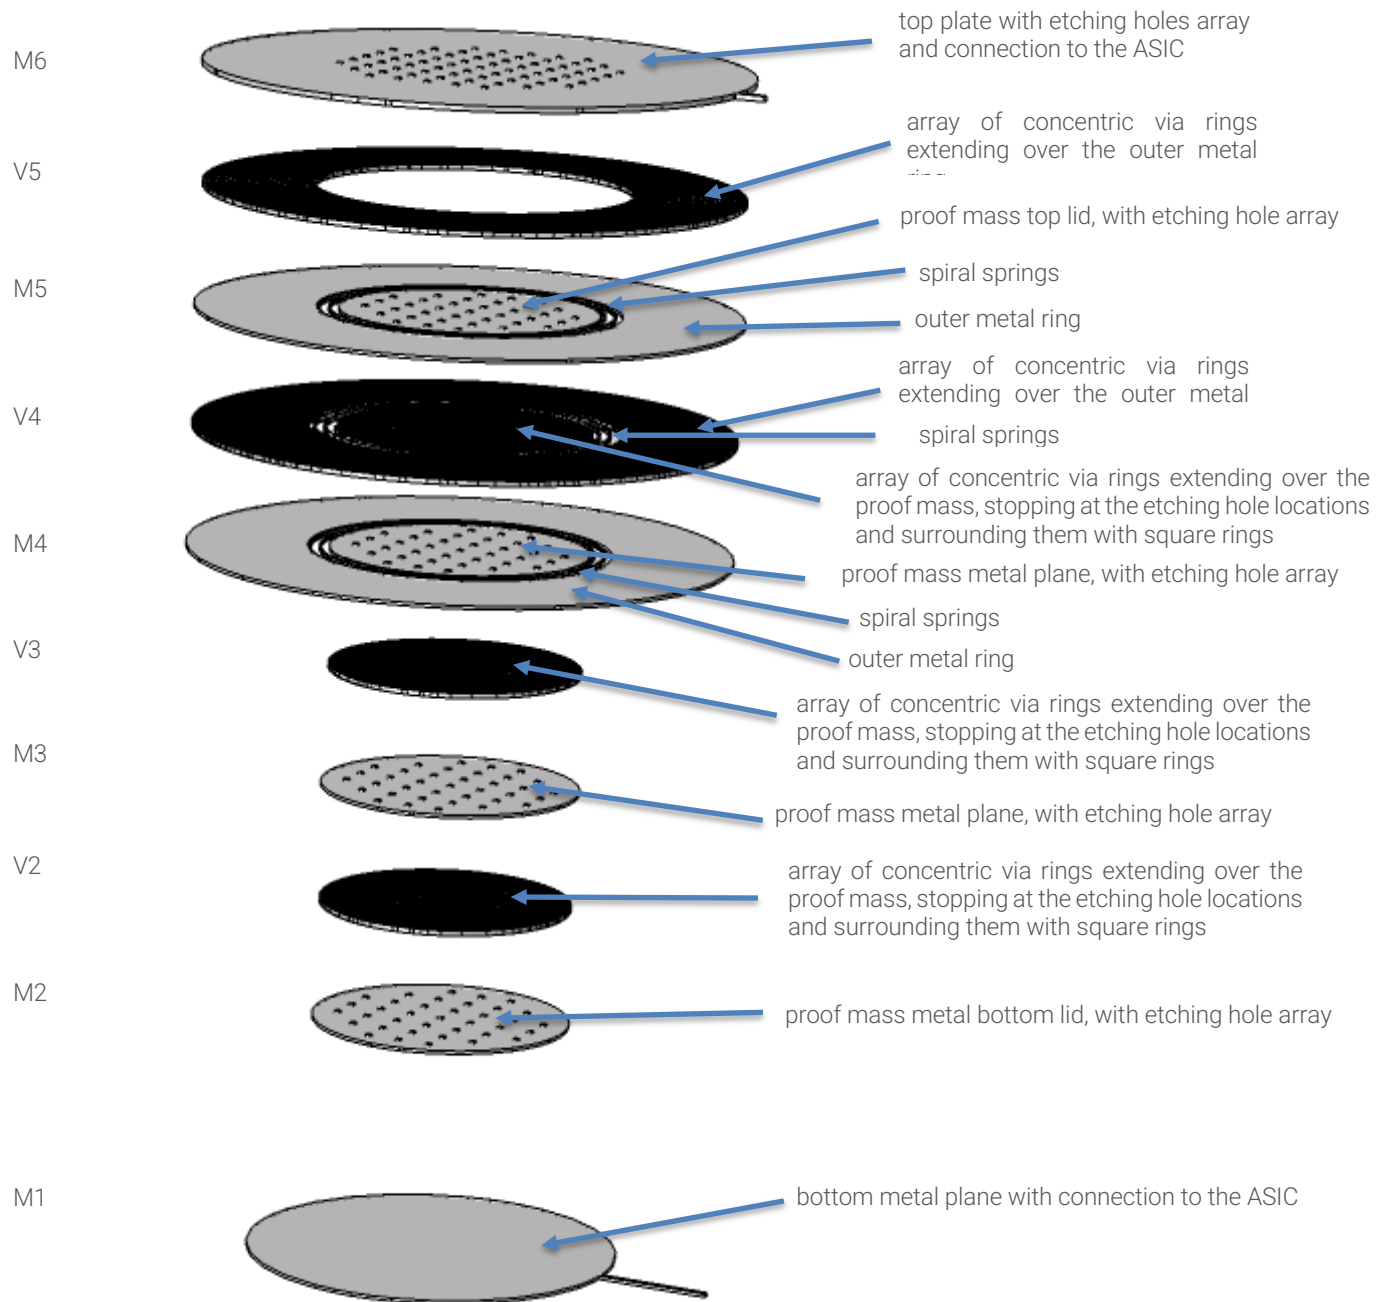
Exploding view of the 3D CAD of the metal and via layers only without showing SiO₂, passivation and substrate.
